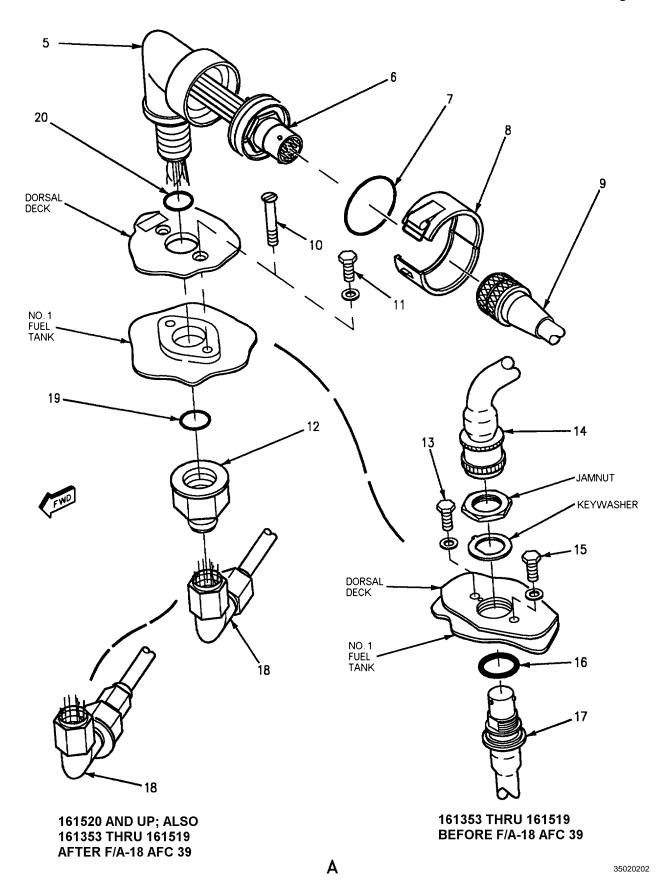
Fuel Tank Access Fittings (Sheet 2)
